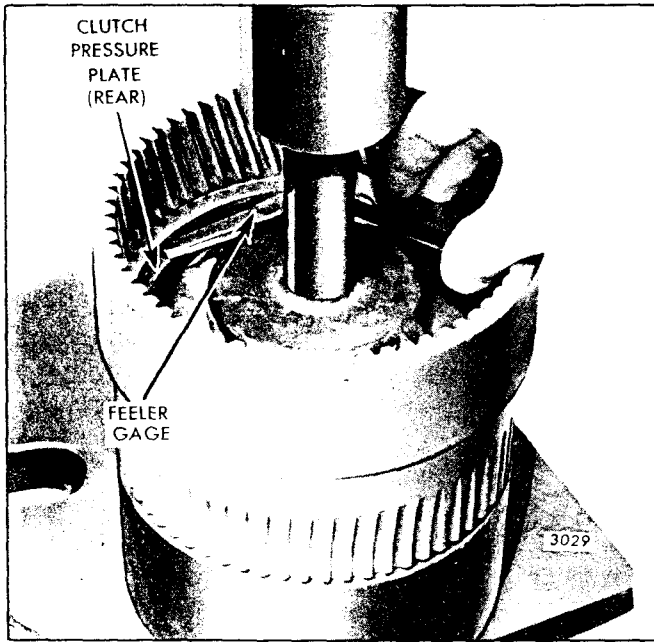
Measuring Gap for Forward Clutch Selective Spacer (Snap Ring)
